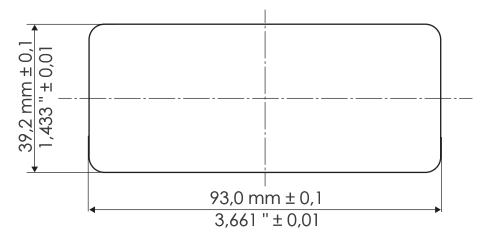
Dimensions for the milled cut-out, TOUCHinlay
